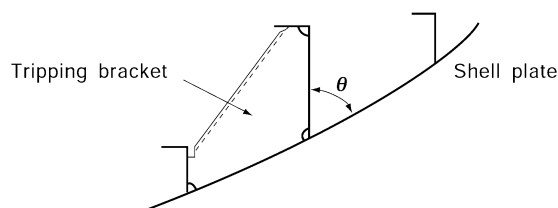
In case the angle between webs of girders and shell plating is small
